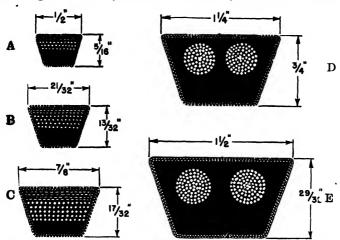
Cross-sectional dimensions of standard multiple V-belts.
